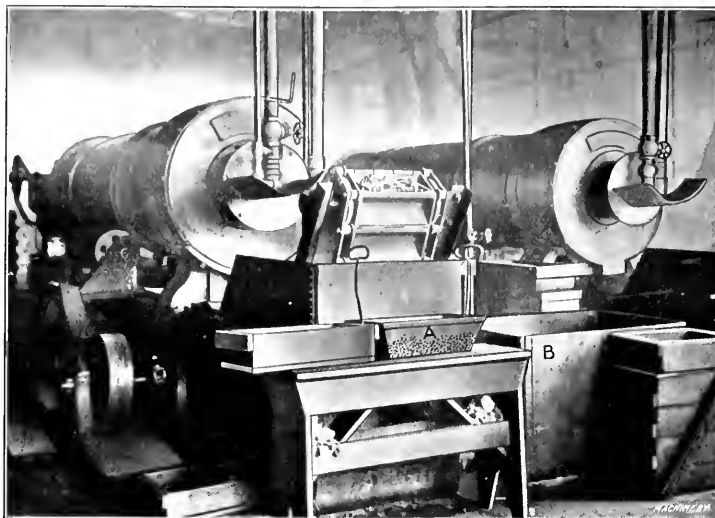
Two Rotary Hardening Furnaces for heat-treating Carriage and Stove Bolts
